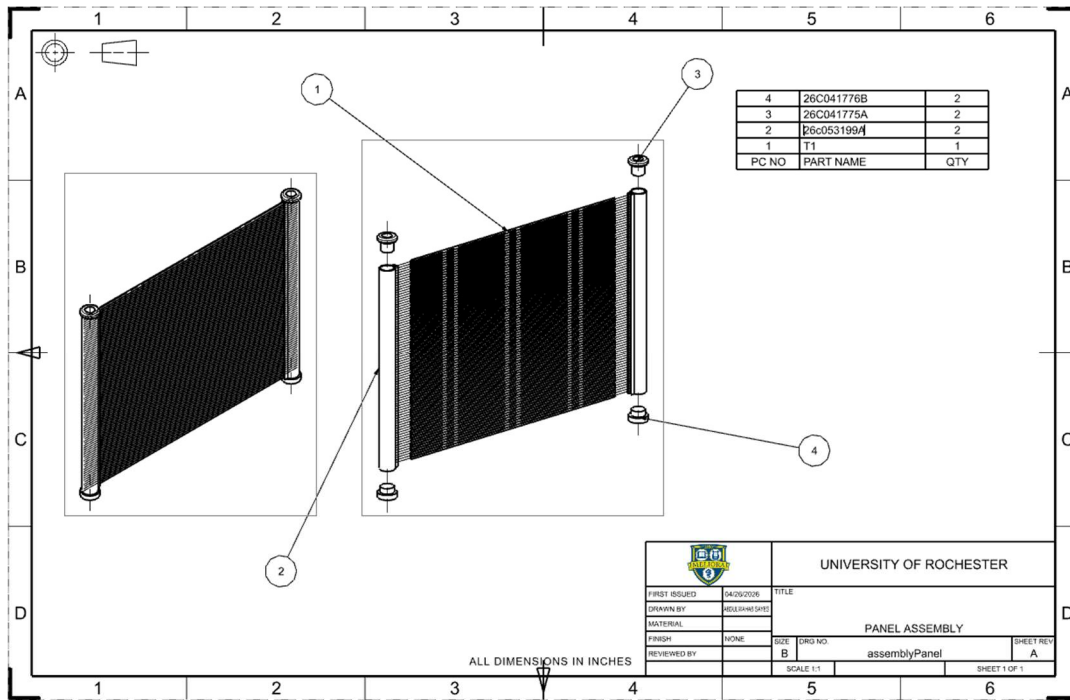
shows the full assembly of the panel. The manifold designs would replace part 2.
